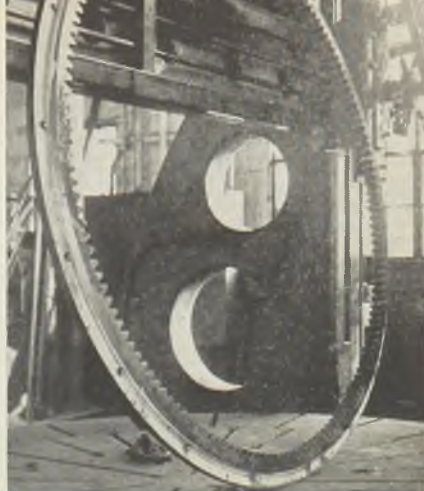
(Above right)—With outside diameter of 120 inches, this gear was flame cut from 3-inch thick plate for a 2500-horsepower compressor motor. So accurate was the flame cutting that the teeth require no machining
